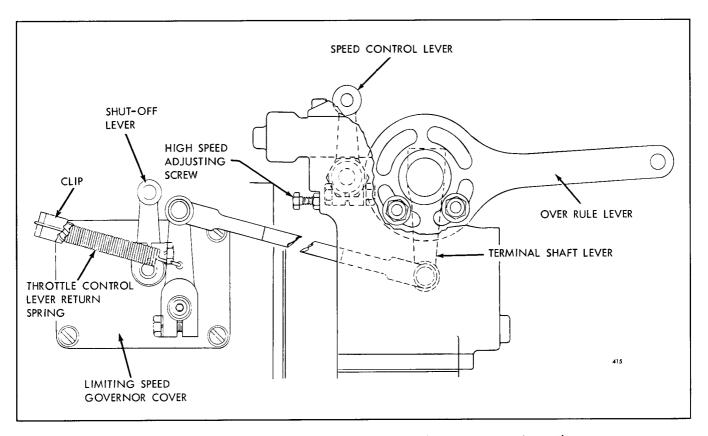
Output Shaft Governor and Linkage for Units with Remote Mounted Air Cleaners
